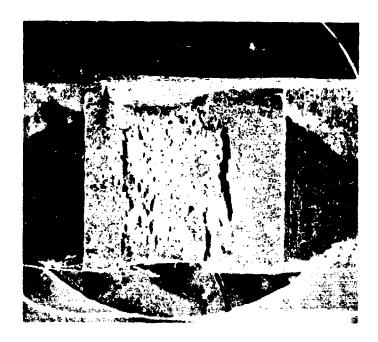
Fatigue fracture surface of hydrogenembrittled A-588 steel, 8x.
